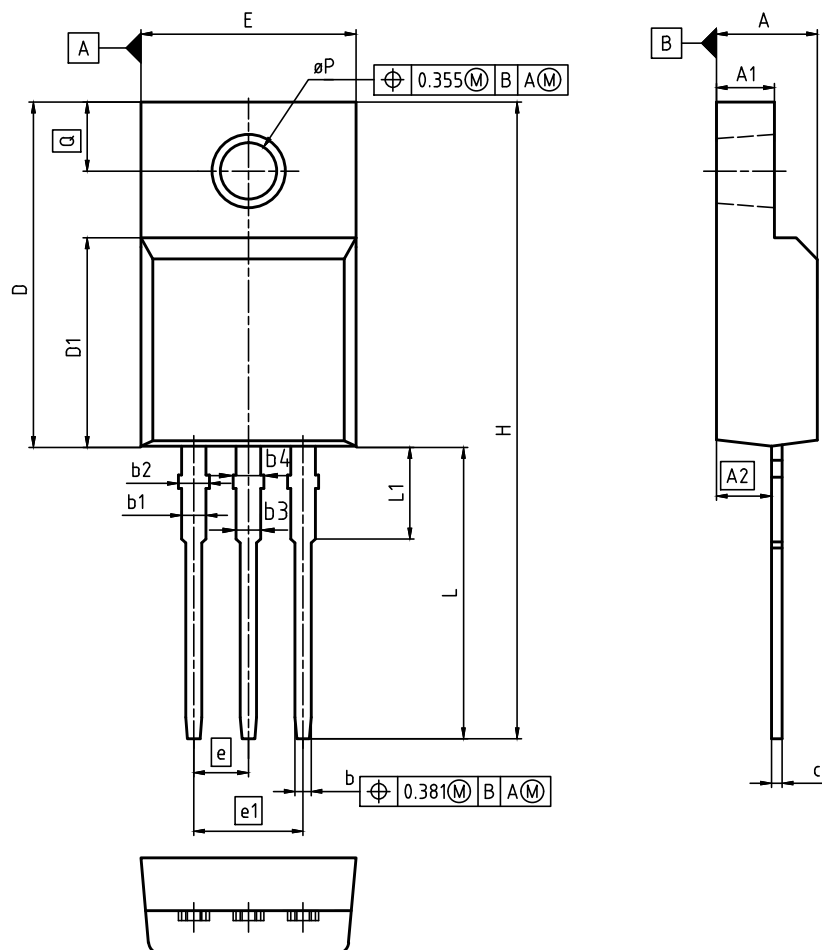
Outline PG-TO 220, dimensions in mm/inches
